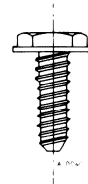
The heatsink tab may be deformed if a washer or a wide-headed screw is not used.
